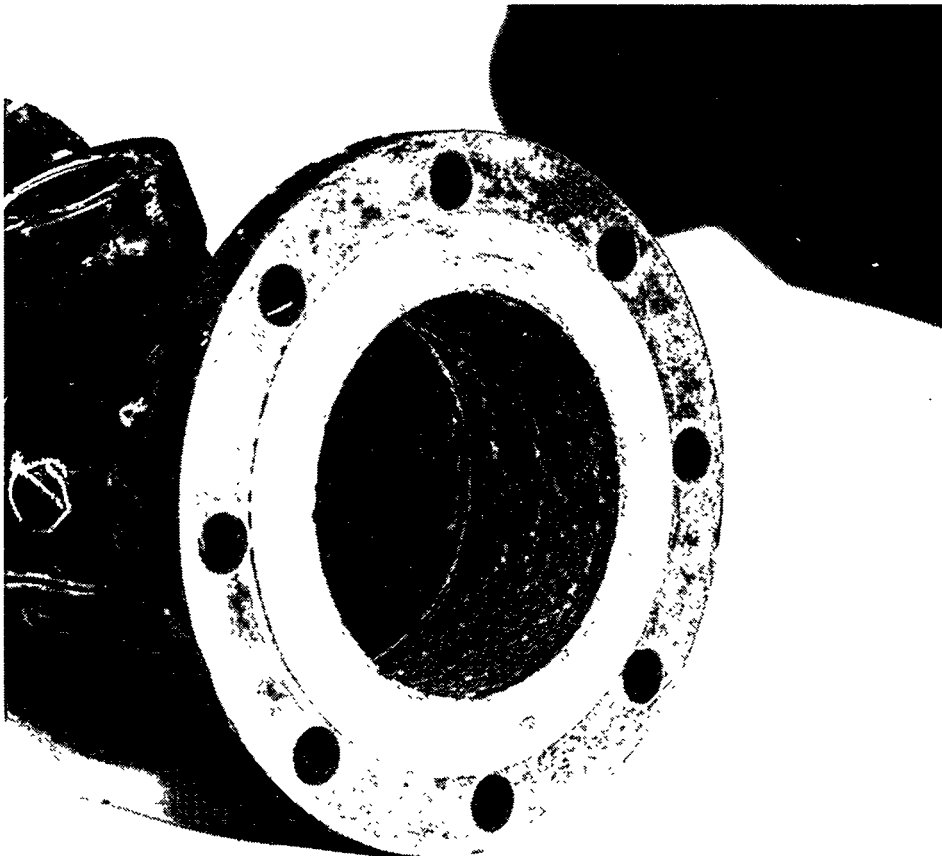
Schematic of pipe section removed from the Service Water Piping System of the Haddam Neck (Connecticut Yankee) Plant
